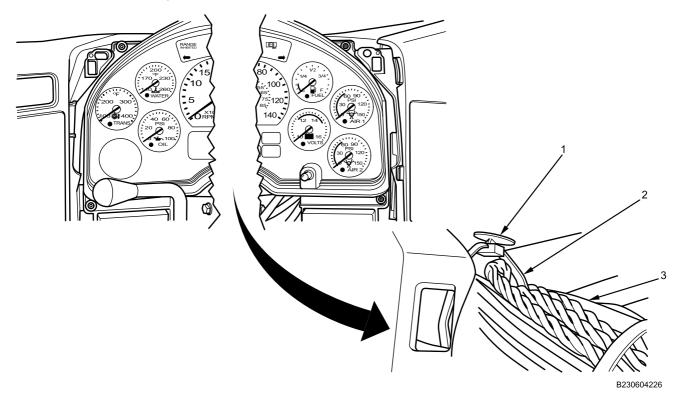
Left Side IP Harness Cable Lock Strap Removal.
